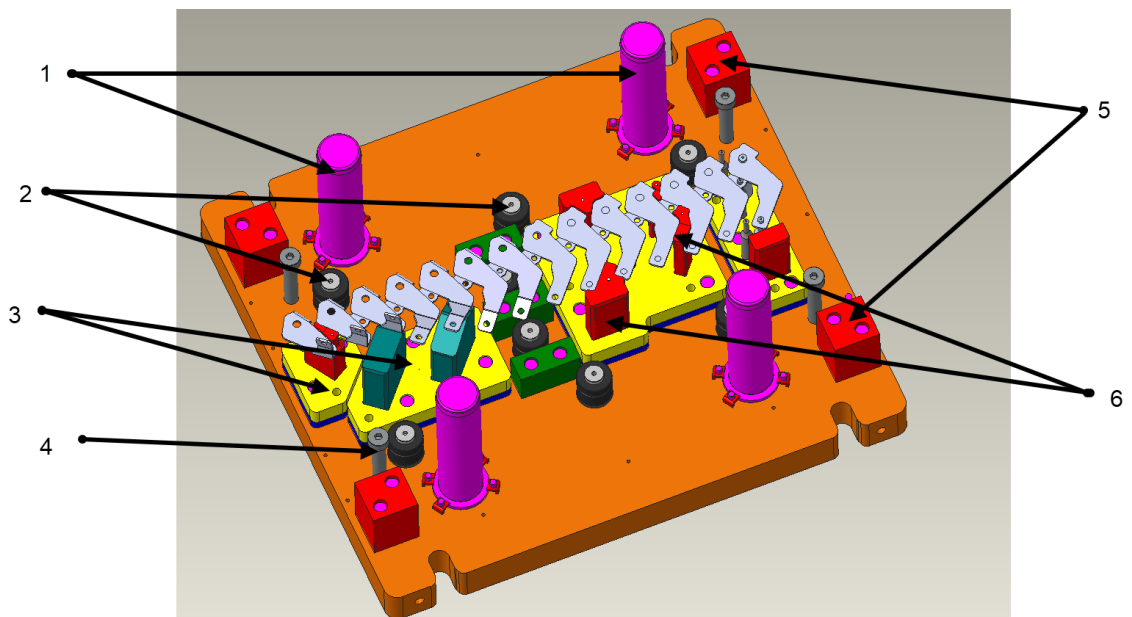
Main component groups of progressive die's top plate. 1 – guiding pins (purple); 2 – gas springs (black); 3 – punch holder plates; 4 – stripper holder pins; 5 – stop blocks; 6 – punches (red and light blue)
